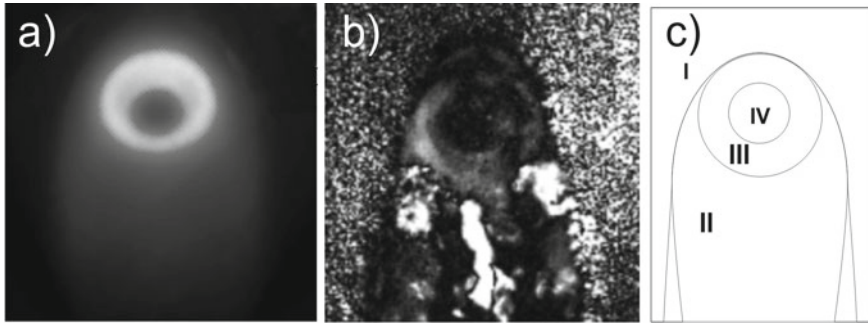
Welding process radiation while welding a without external illumination, b illuminated with 150 mW diode laser, c phase boundaries I: solid surface II: melt pool geometry III: thermal radiation surrounding the capillary IV: capillary
